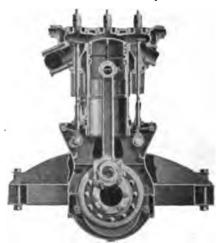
The Moore Car, vertical section through one cylinder, showing inlet and exhaust valves, short levers riding on cams and carrying lifter rods. Ball bearing of crank shift with the yoke holding same to upper half of crank case. Hollow crank and wrist pins. Note very long and light piston, and extreme length of valve rod guides.
